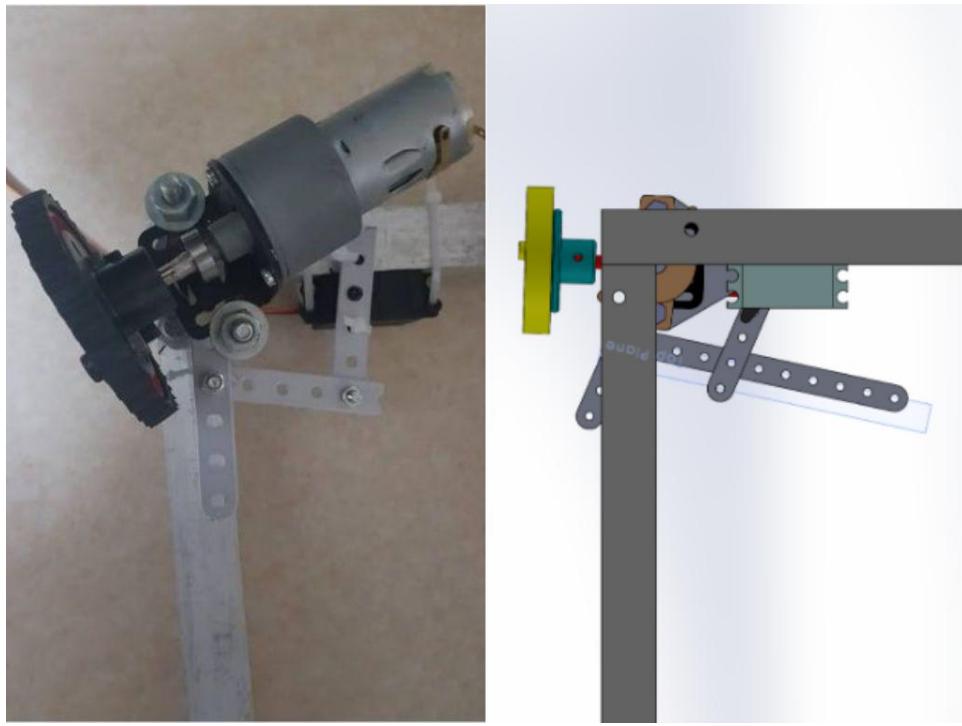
Rear End Assembly (a) Left: Final Build (B) Right: CAD Build
